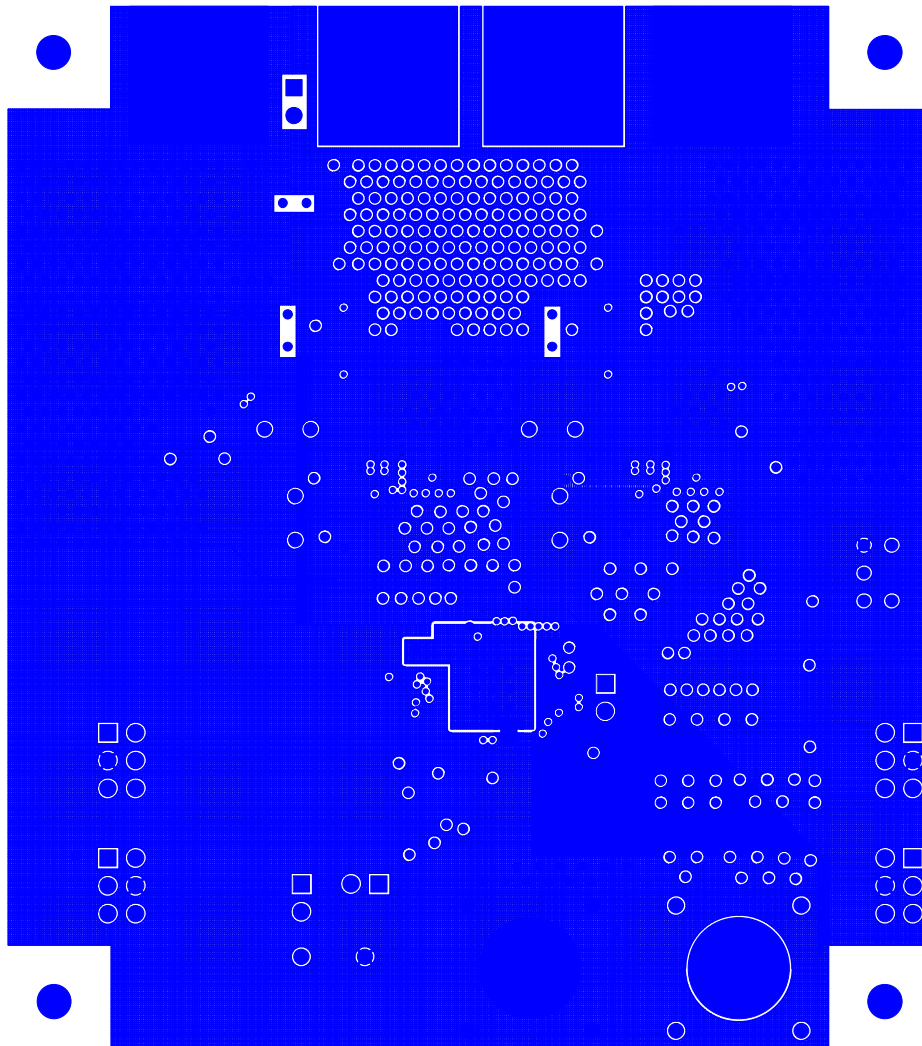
PCB - INNER LAYER 1 (TOP VIEW)
